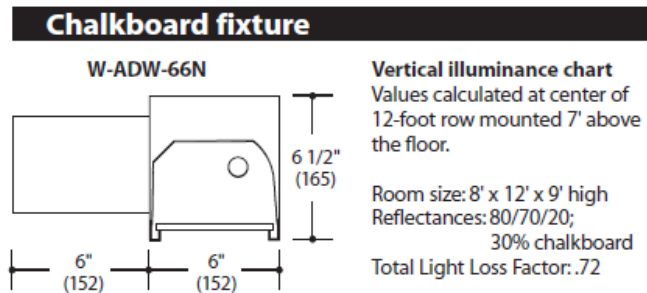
BOARD WASH LUMINAIRE DETAIL
